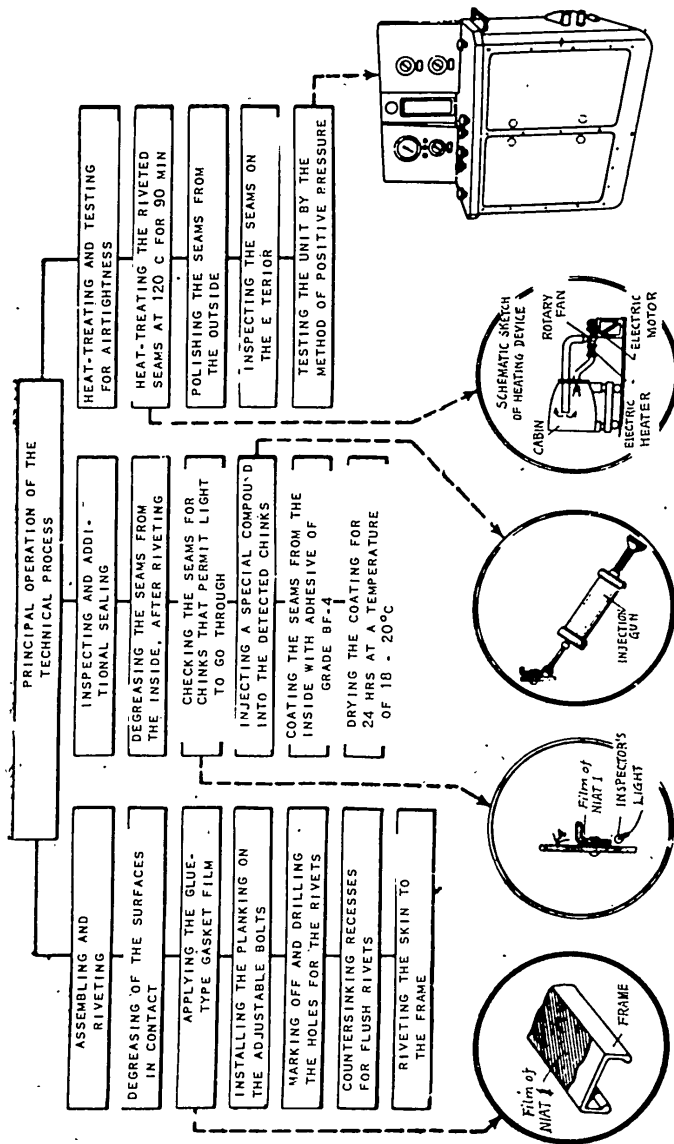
Typical Technical Process of Assembly and Riveting of Cabins with application of Glue-Type Sealing Compound
